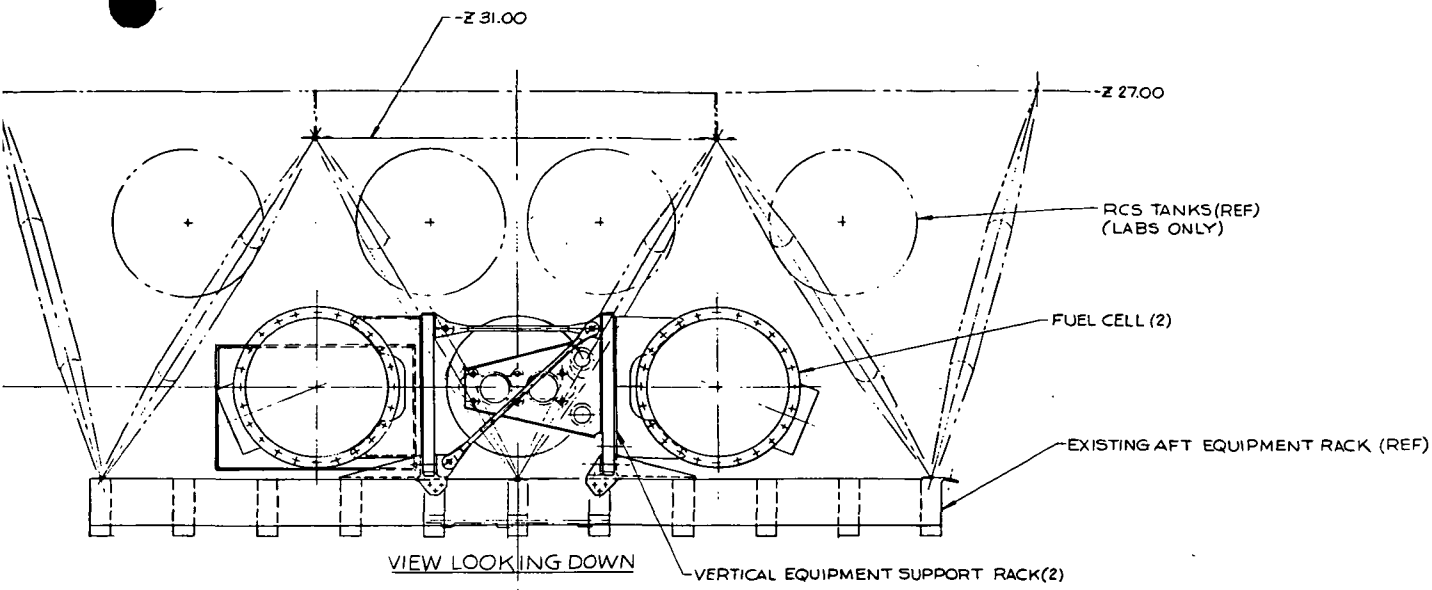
AC Fuel Cell Assembly Installation
